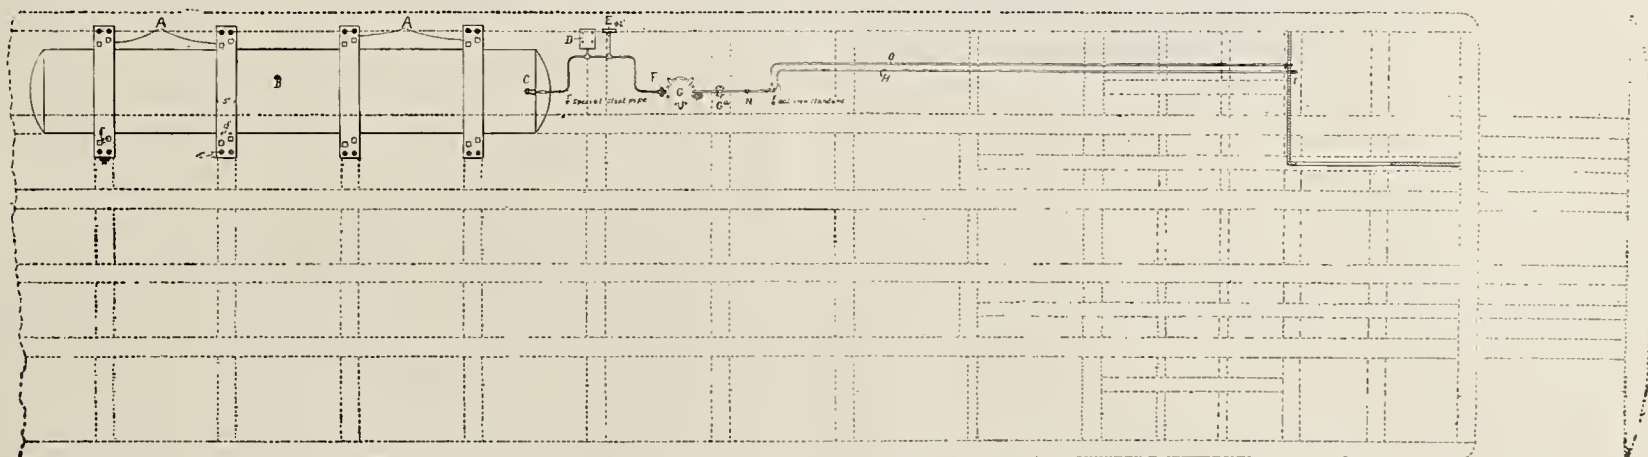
SHOWING INSTALLATION OF CYLINDER, PRESSURE GAUGE FILLING VALVE, REGULATING VALVE AND PIPING UNDER CAR.
